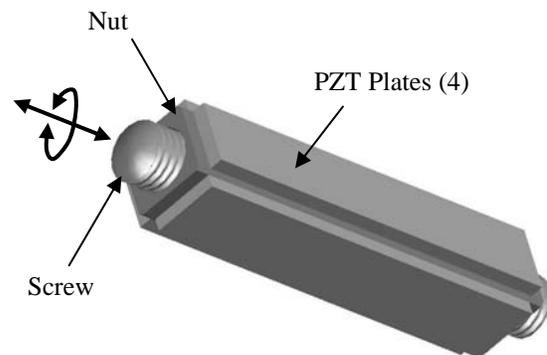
SQUIGGLE Motor – A Vibrating Nut Turns a Screw
